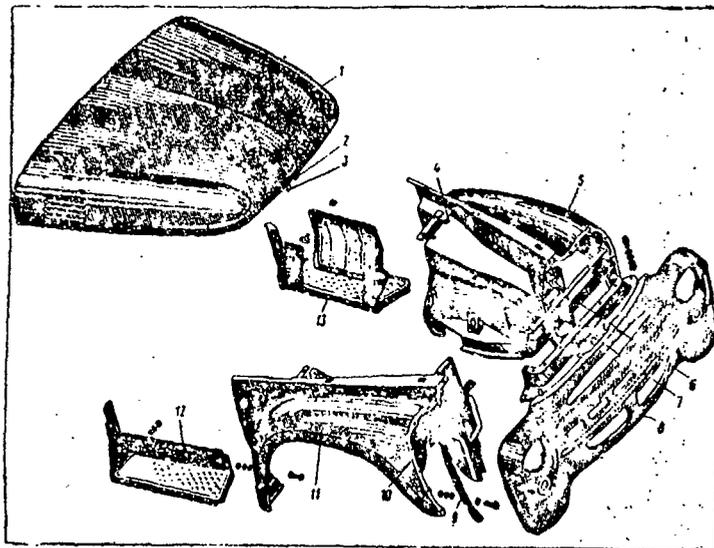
Hood and Fenders of ZIL-130: 1, hood; 2, hood latch rod; 3, hood safety latch; 4, spray shield; 5 and 11, fenders; 6, 9 and 10, seals; 7, hood latch; 8, radiator shield; 12 and 13, supports
